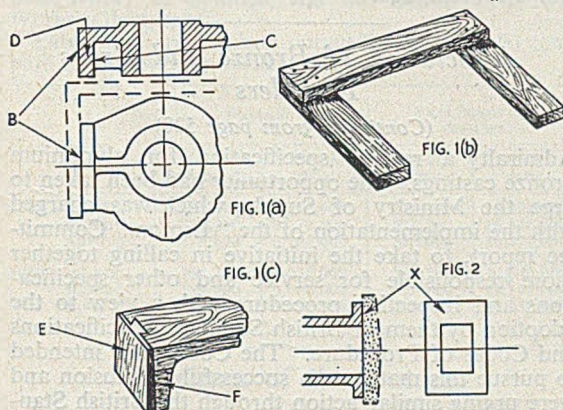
(a).—Part-section of a Pattern on which Parallel Faces are required; (b) Improvised Strickle, and (c) Parallel Face formed by a Loose Piece.
